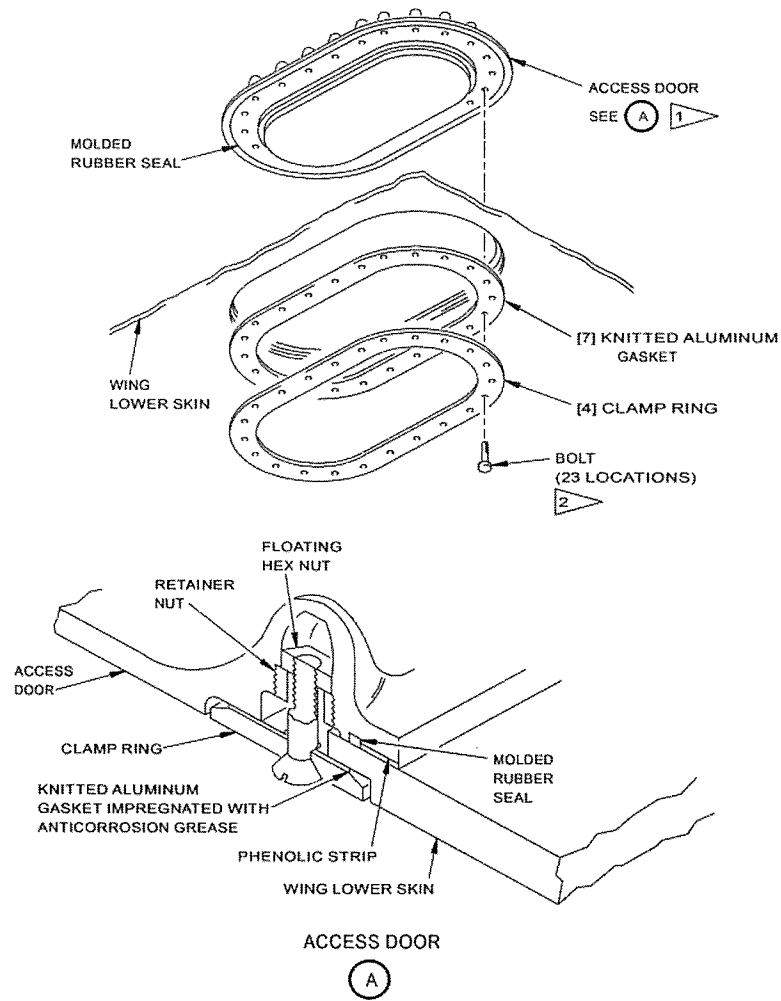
Wing Surge Tank Access Door Bolt Torque Pattern (Sheet 1) / 28-11-03-990-802
